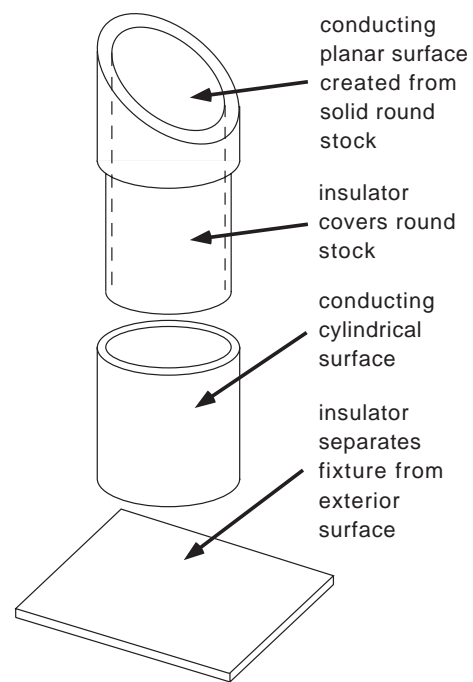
A CYLINDER-PLANE FIXTURE DESIGN
